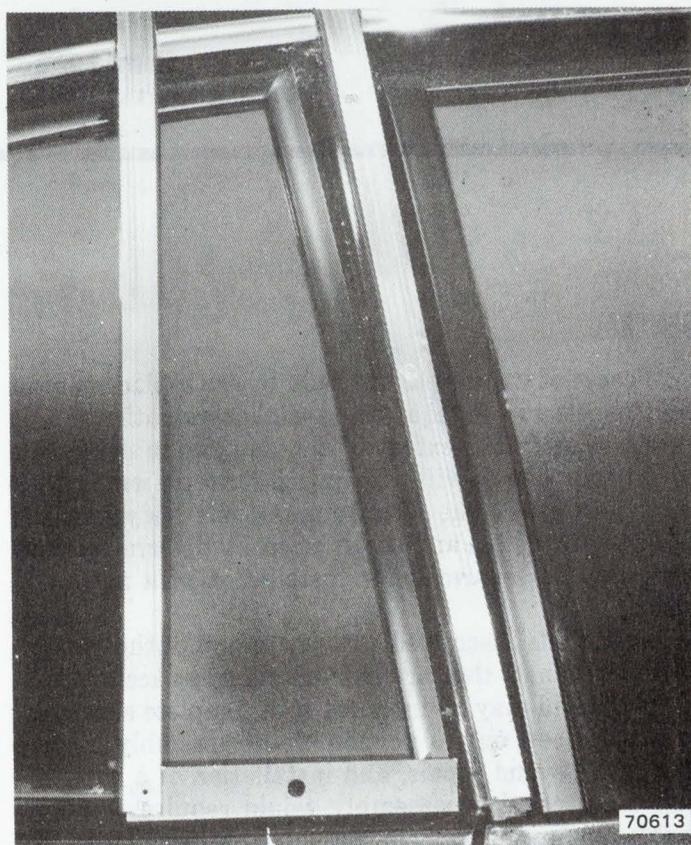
F-7 Attaching Extrusion to Lower Bracket
